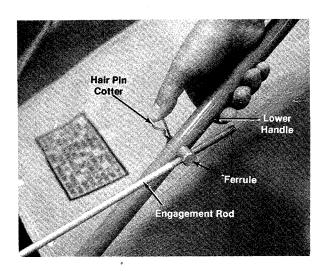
ADJUSTMENT OF ENGAGEMENT ROD
